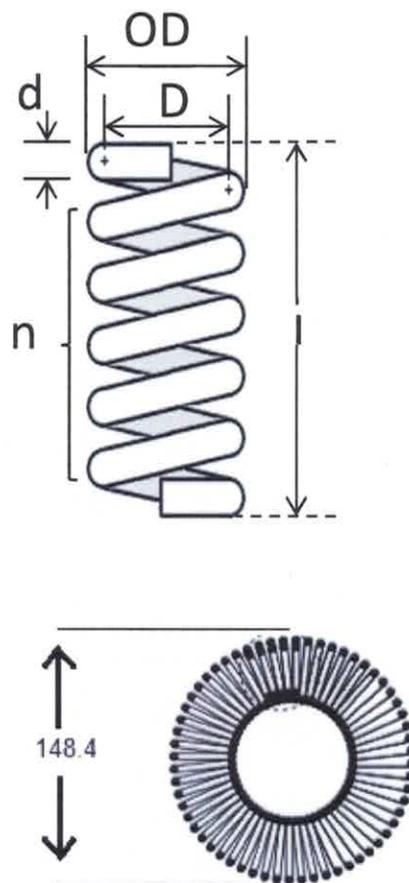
Upper sketch side view of the XXL spring. Lower sketch up view of the spring torus
